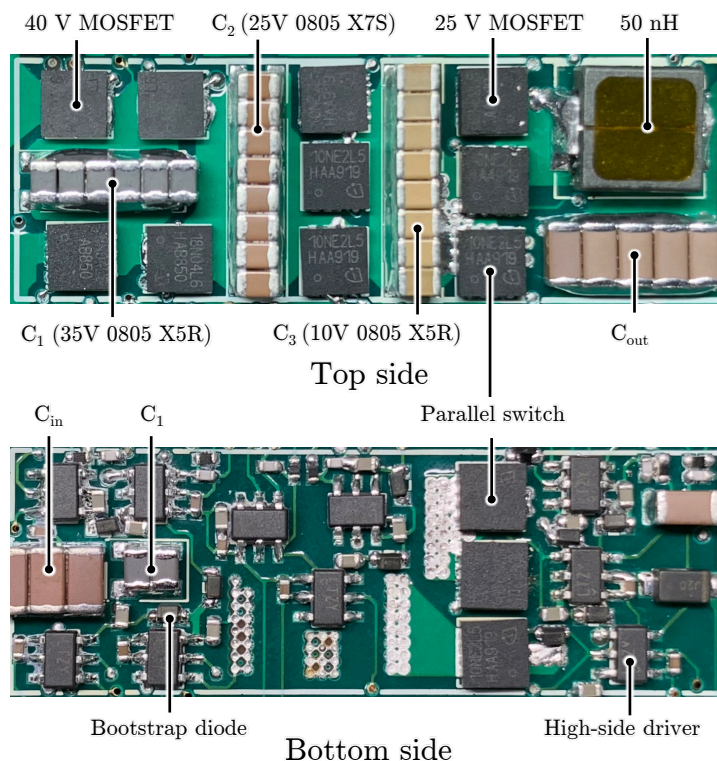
Photograph of the converter prototype. Dimensions: $1.38 \times 0.46 \times 0.22$ inch ($3.5 \times 1.17 \times 0.55$ cm).
